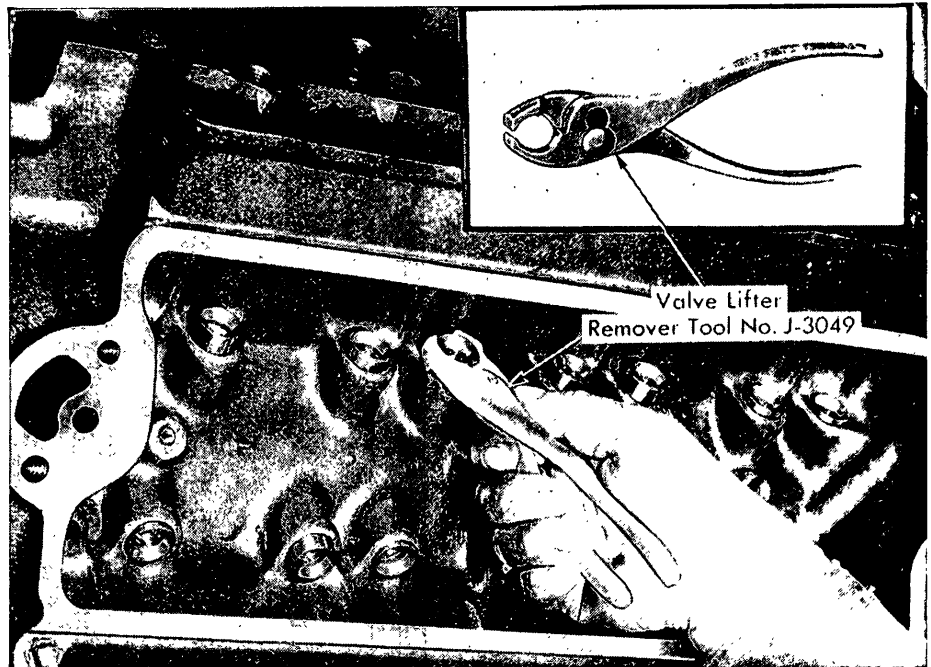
Removing stuck valve lifters from 1949-52 Rocket
